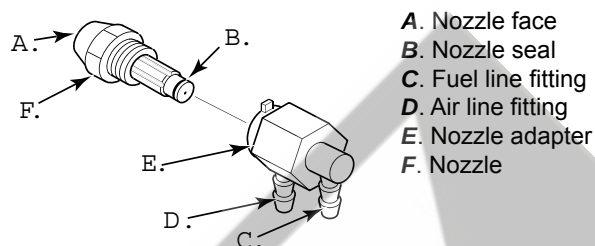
Nozzle and nozzle adapter, 35.000 Btu/Hr.
